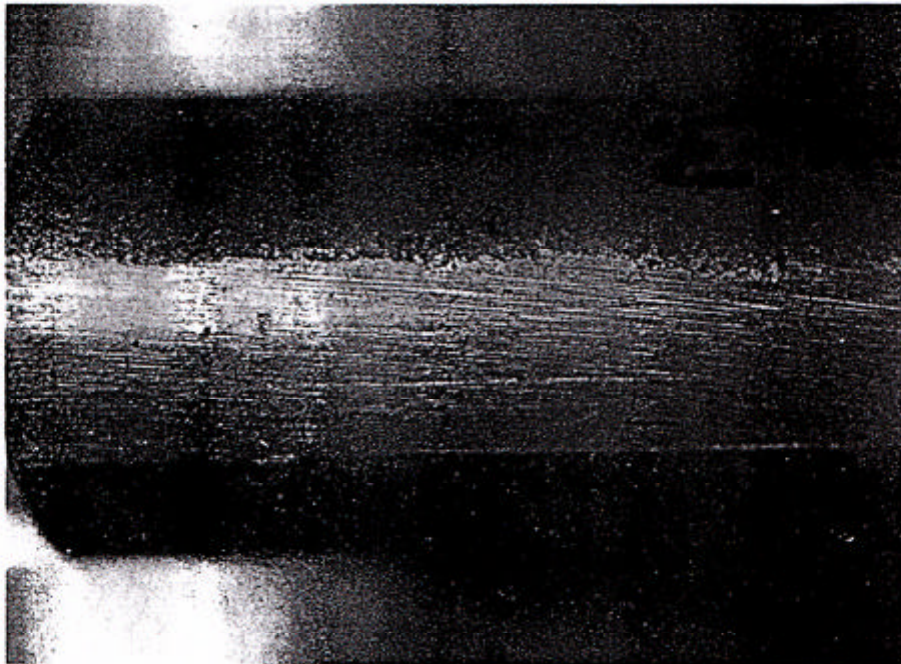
SUB-ARC WELDED - 4.55 MM
